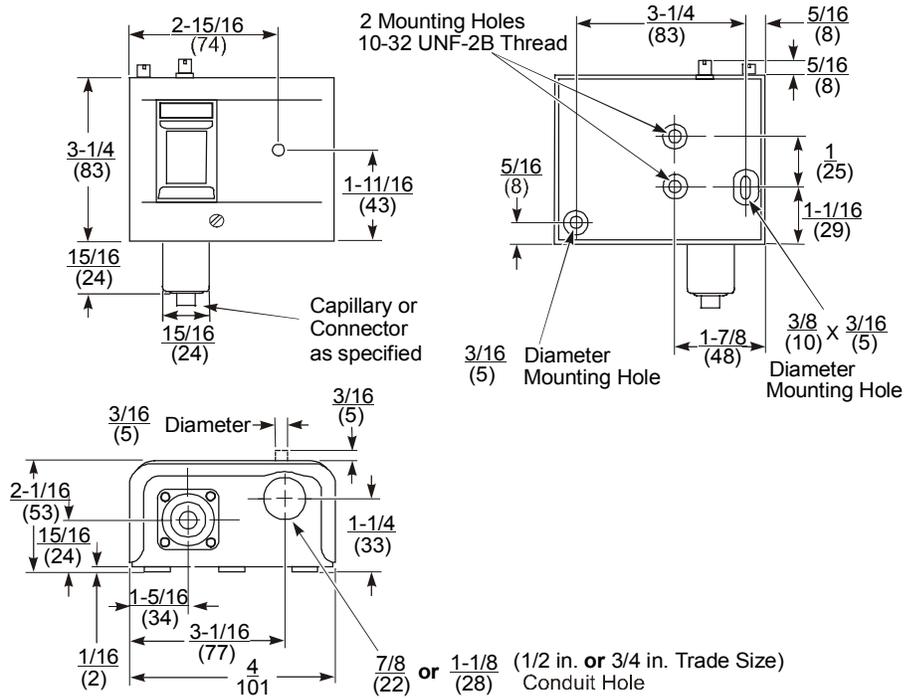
Dimensions for High Pressure Controls with NEMA 1 Enclosure, in. (mm)
